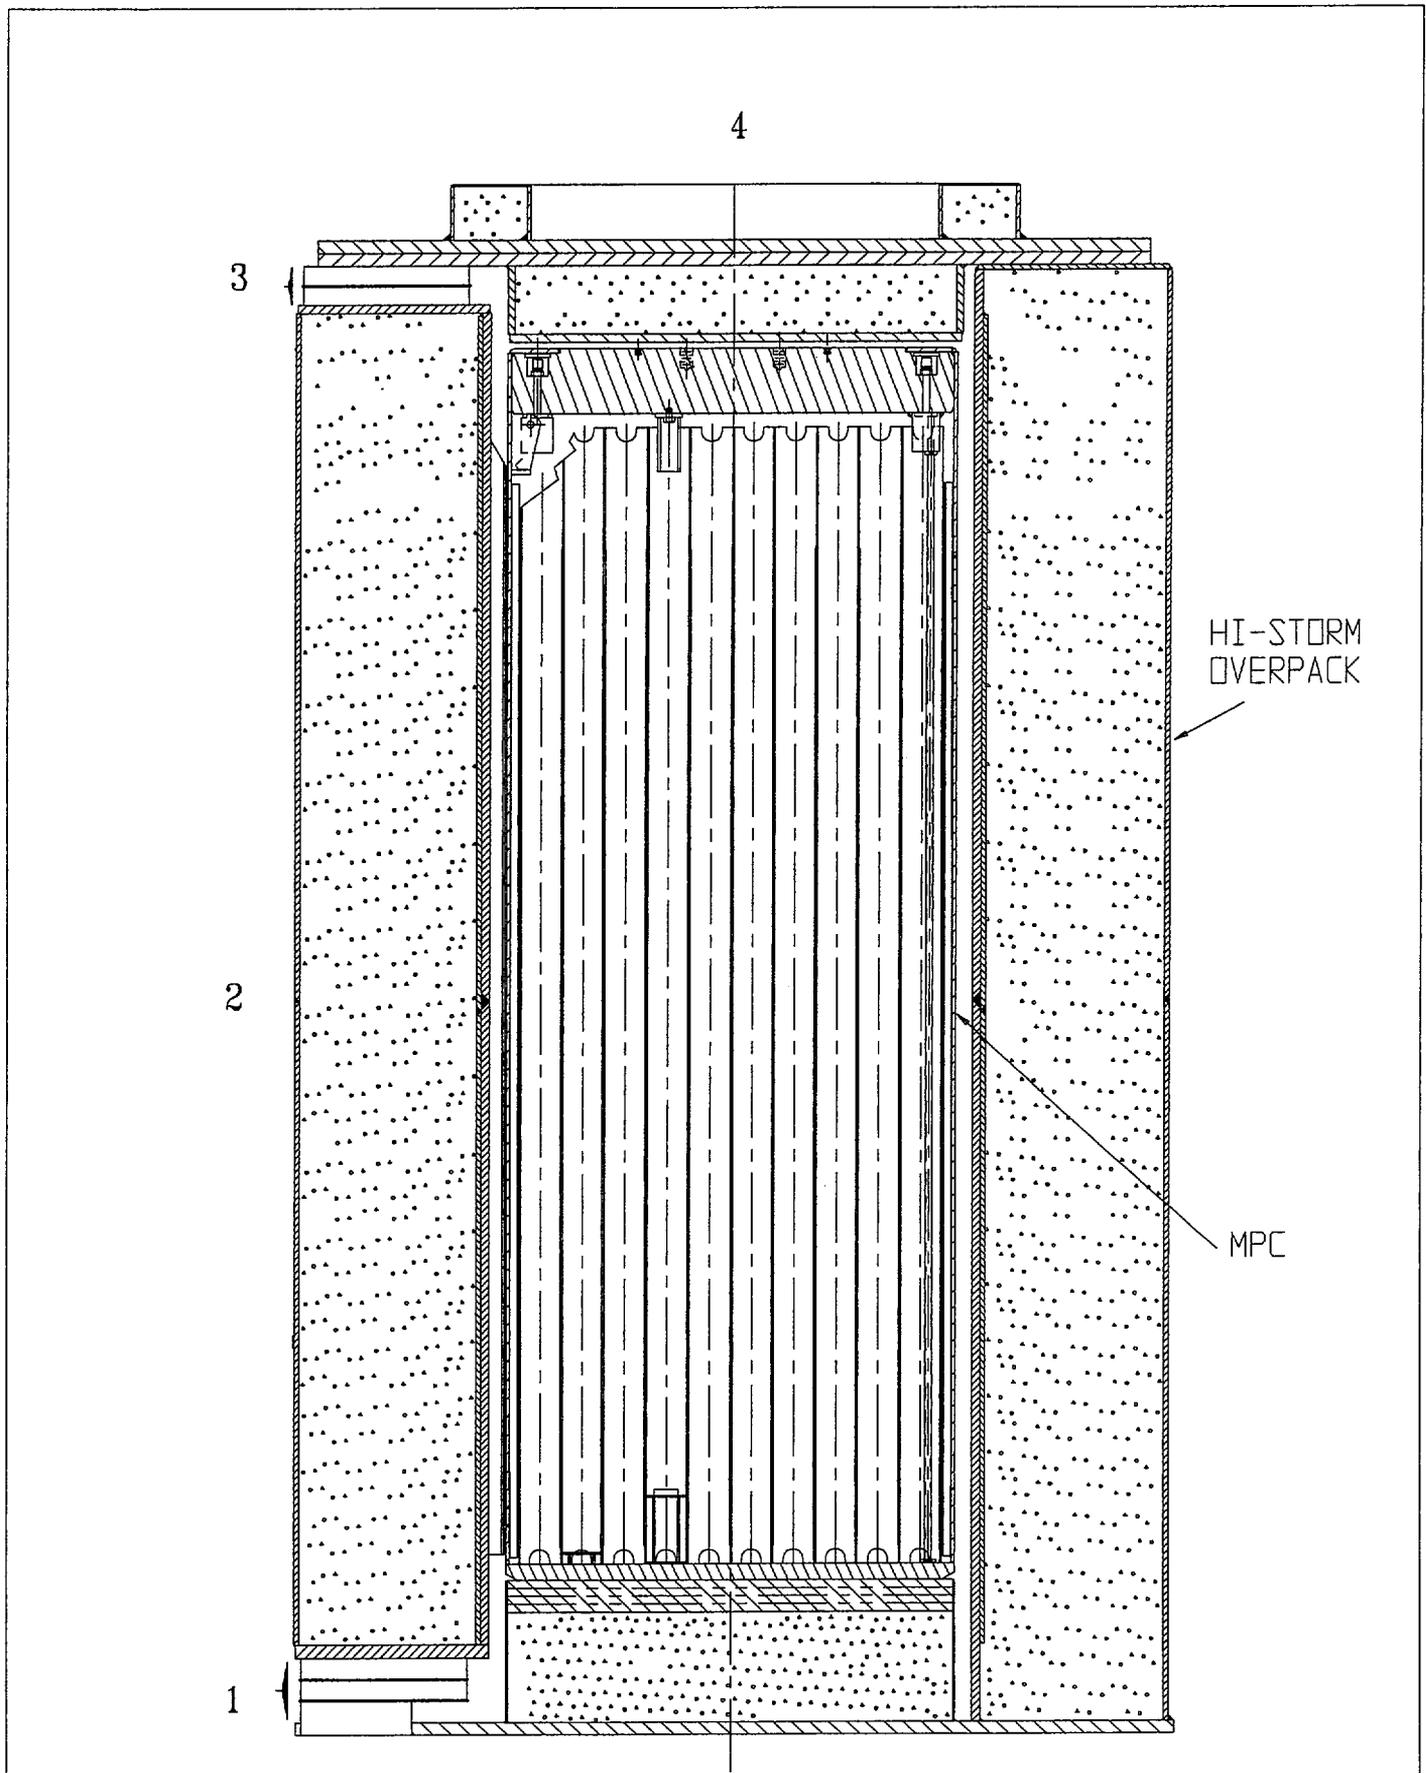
; CROSS SECTION ELEVATION VIEW OF HI-STORM 100 OVERPACK WITH DOSE POINT LOCATION
